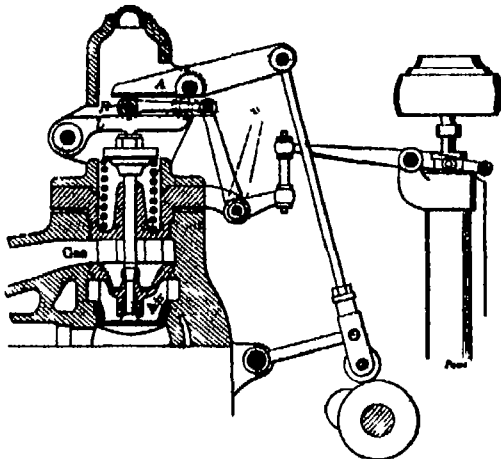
SCHMITZ MOVABLE FULCRUM GEAR
